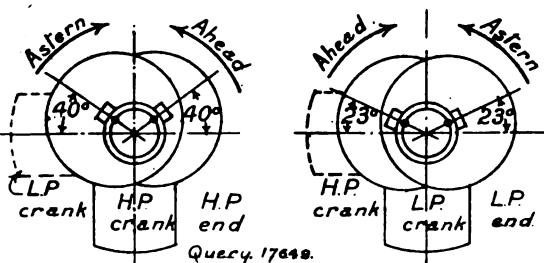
ECCENTRIC SETTINGS FOR COMPOUND ENGINE.
